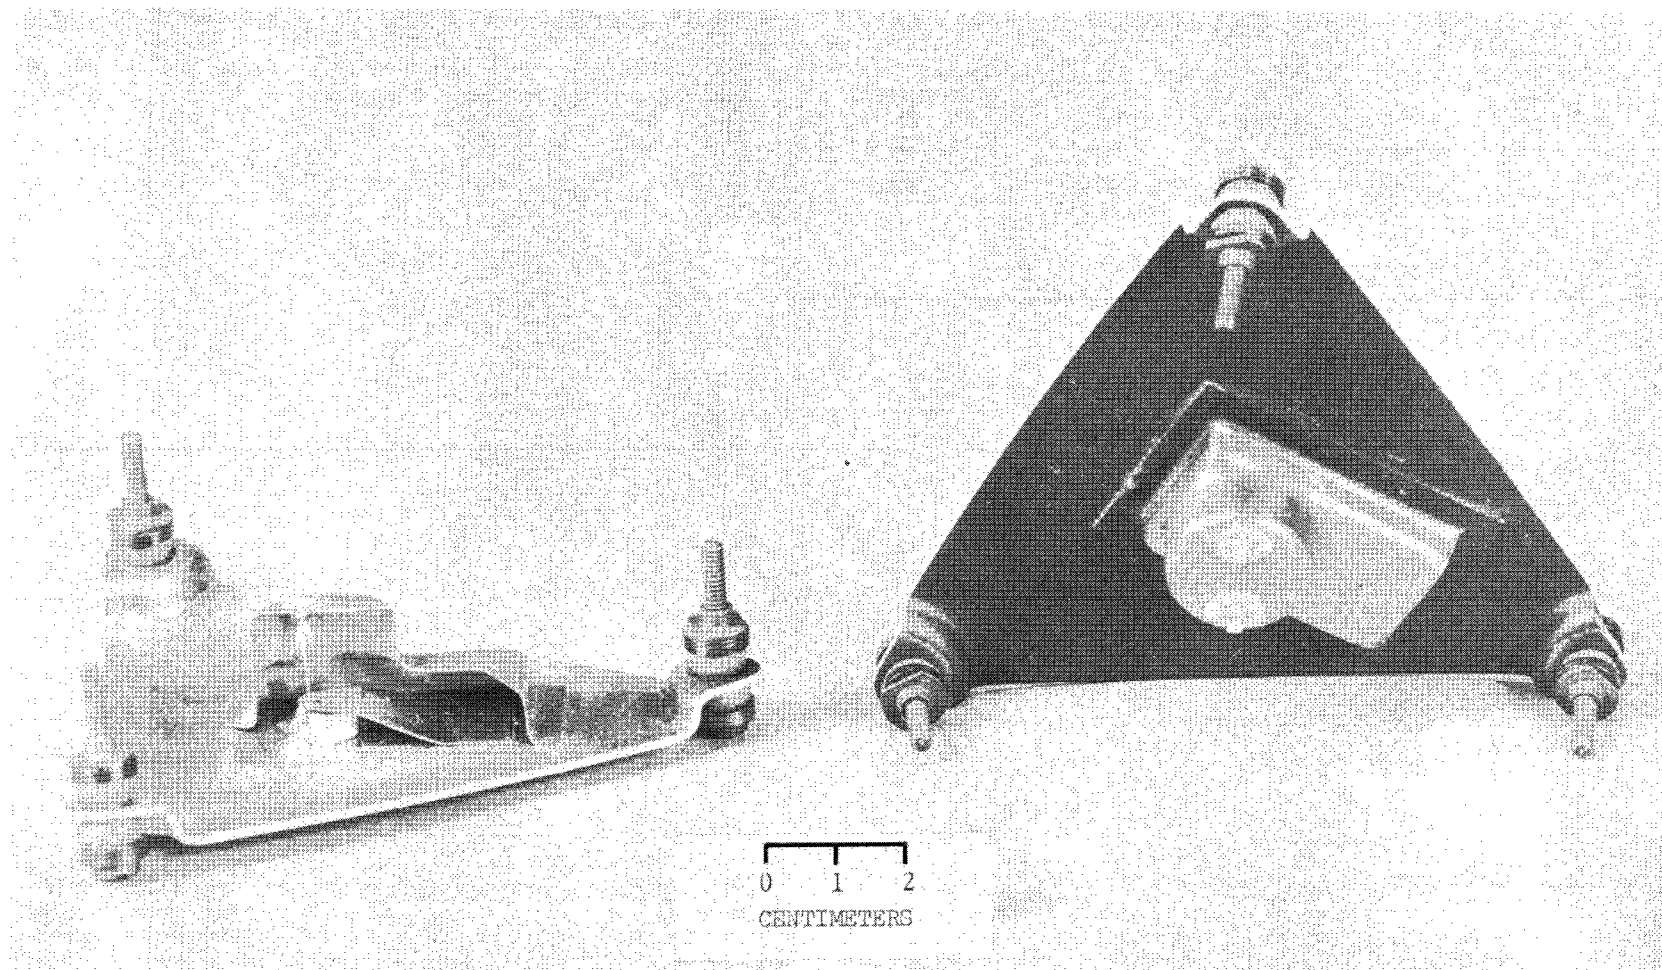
View of back side of typical sounding board showing transducer mounting and shielding technique.
